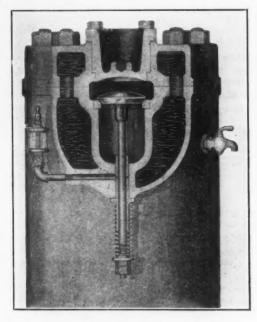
Section Through a Valve Showing the Water Jacket.
